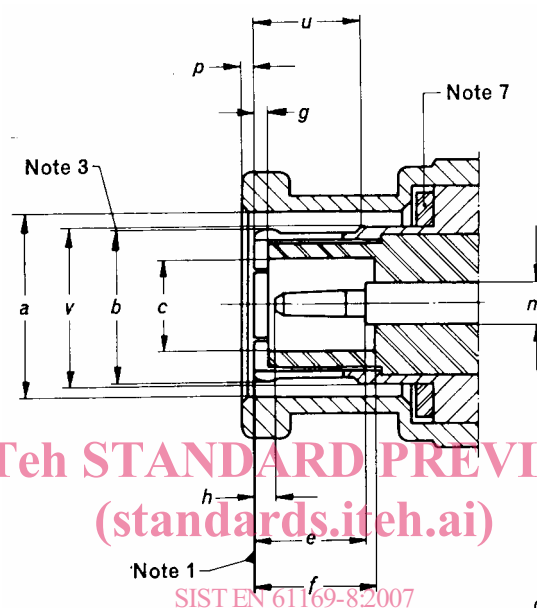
Connector with pin-centre contact (for dimensions, see Table 1)
